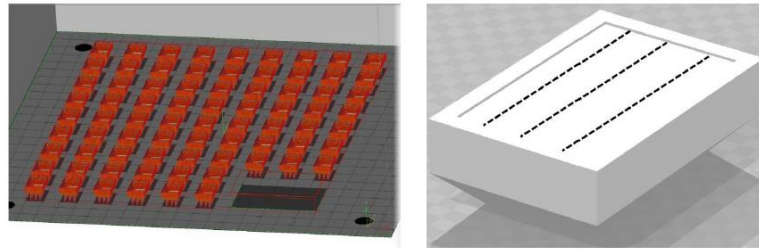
Left) CAD drawing of crucibles on base plate used during an experiment, Right) Three single track structures placed at the top of the crucibles [8].
